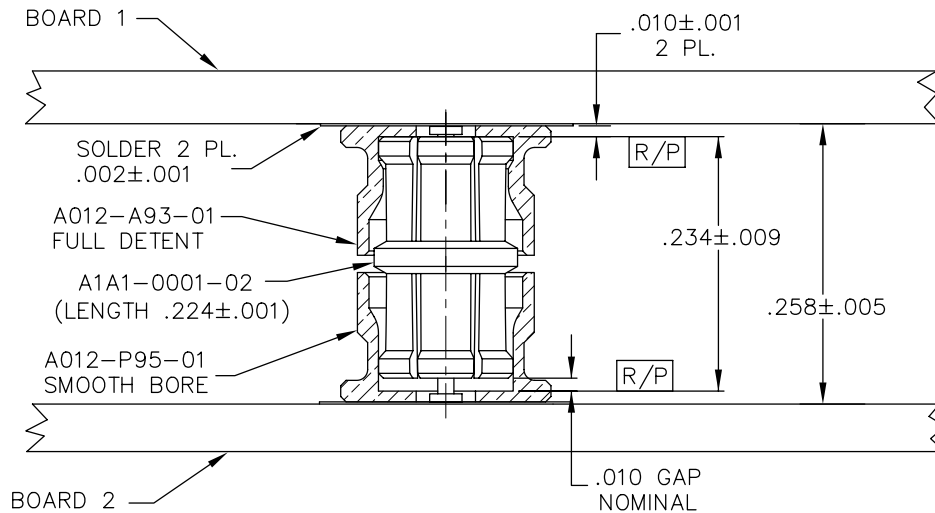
GPO Minimum Board-to-Board Tolerance Analysis
